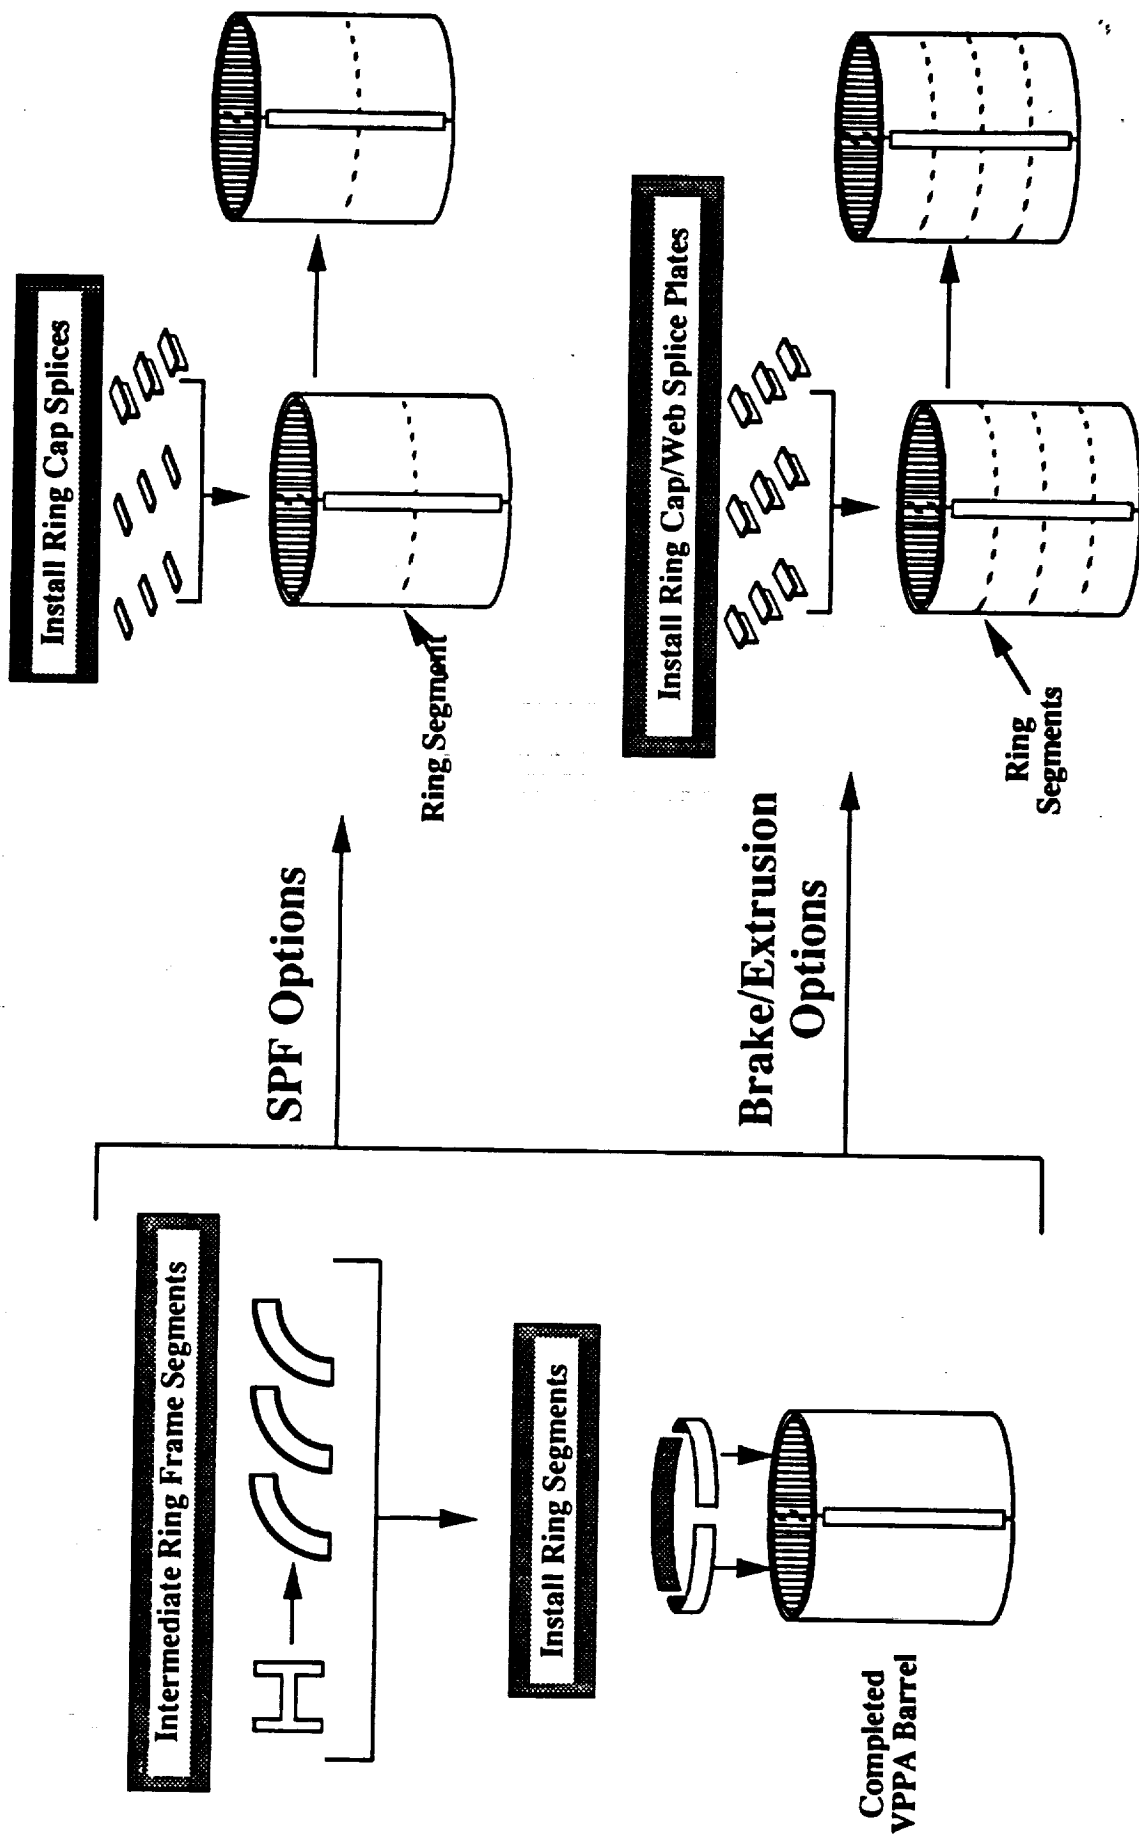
Manufacturing Process Flow for Barrel Section Forming.
